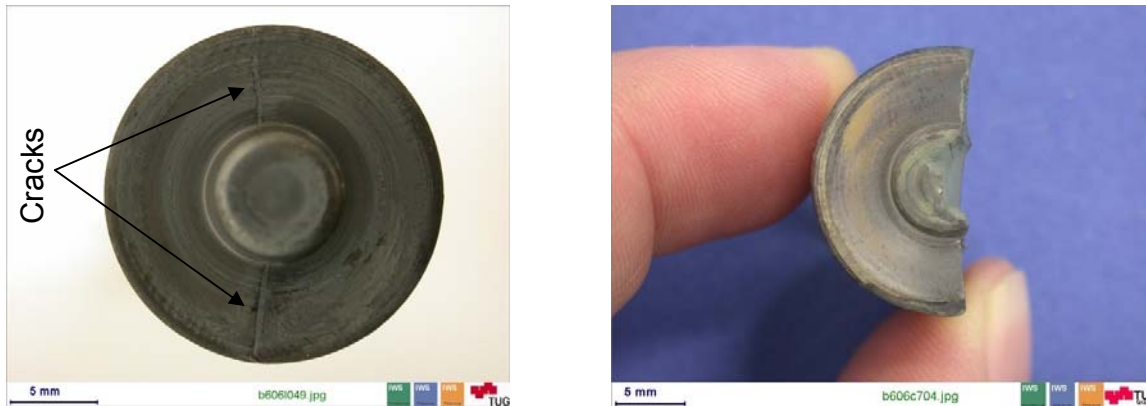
Radial cracks in the tool shoulder after touchdown (left), tool fracture after touchdown of the shoulder (right)
